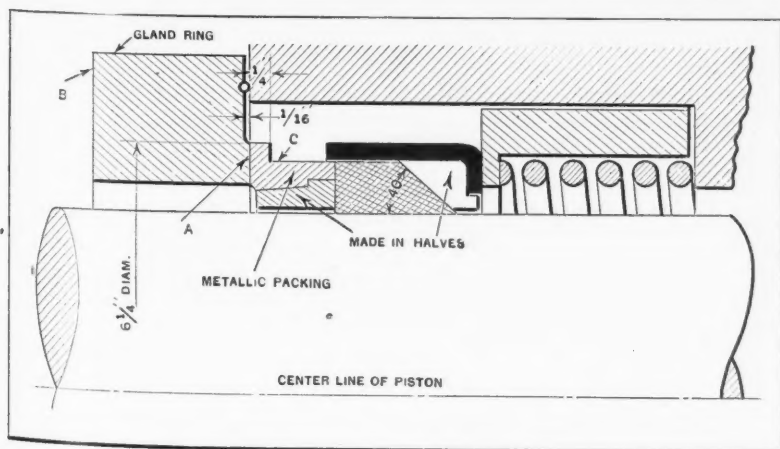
Typical Piston Packing Ground-in for Steam-tight Fit at A on Machine Shown in Fig. 1
